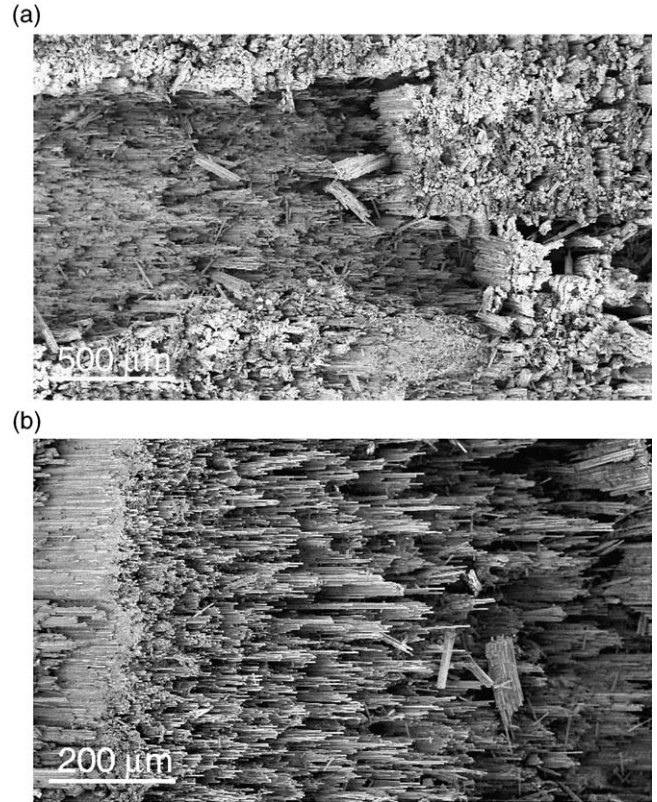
Cracks and damages on machined specimens (F593 panels, fibre orientation=150°, rake angle=40°), (a) depths of cut=0.050 mm, (b) depths of cut=0.100 mm.
